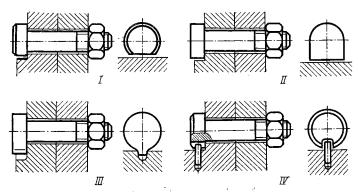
Erroneous construction of elements for locking bolts against rotation
